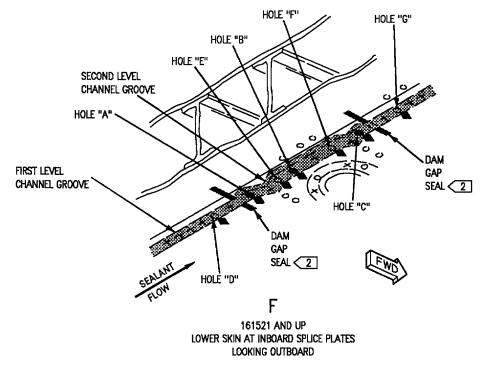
Lower Skin Channel Groove Seal Injection (Sheet 7)
